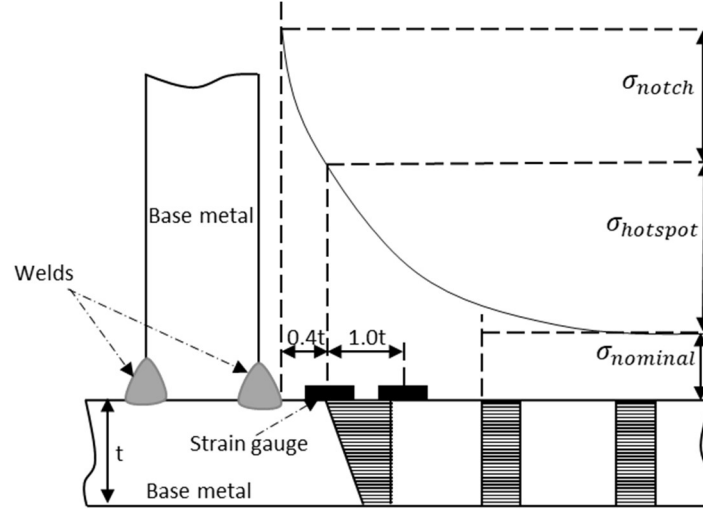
Stress extrapolation approaches at the welded joint location
